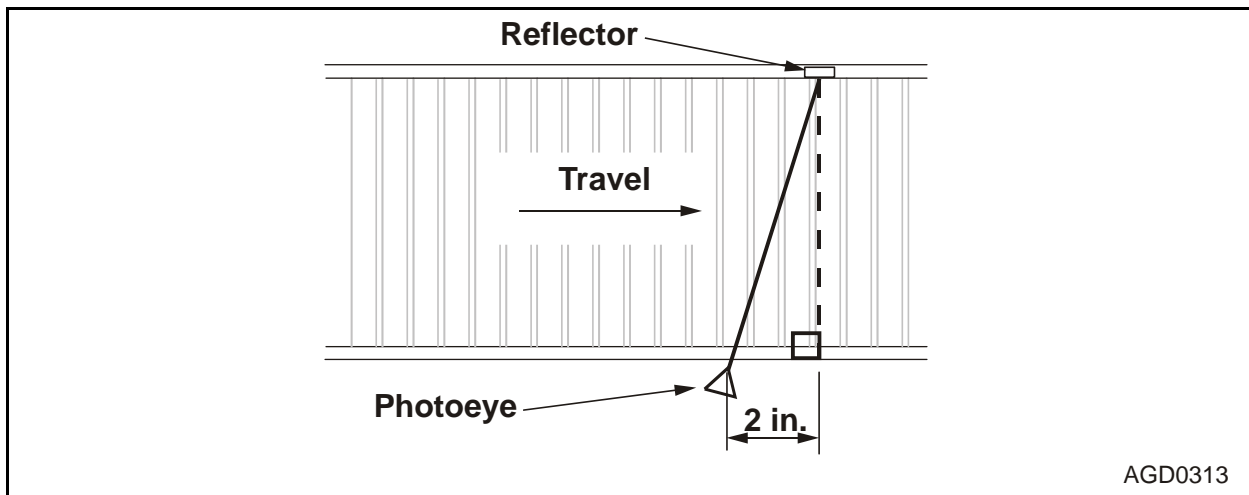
10 Reflector Placement for Sequential Zone Control - Boxes
